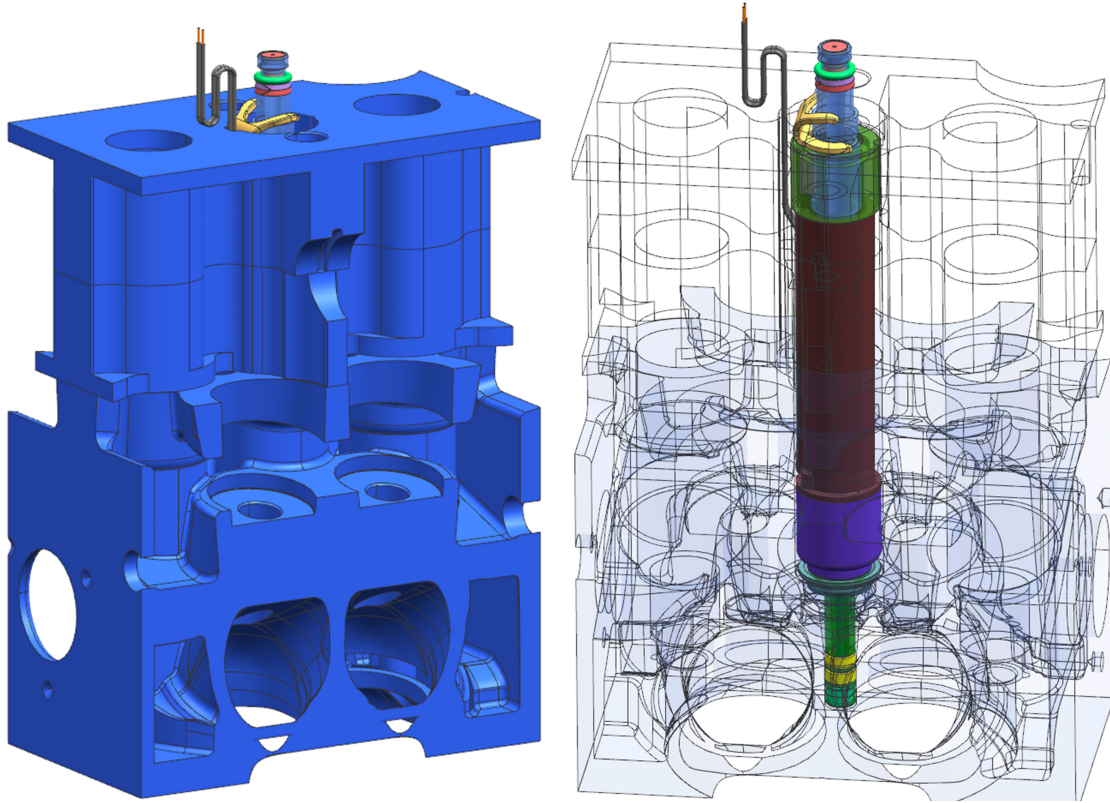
Different views of the fuel injector prototype installed in DPC cylinder head.
